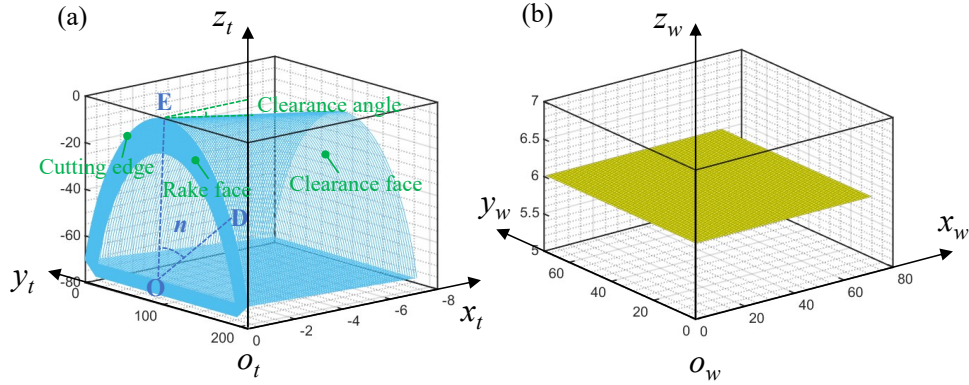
Discretization results of (a) the cutting tool and (b) the workpiece.
